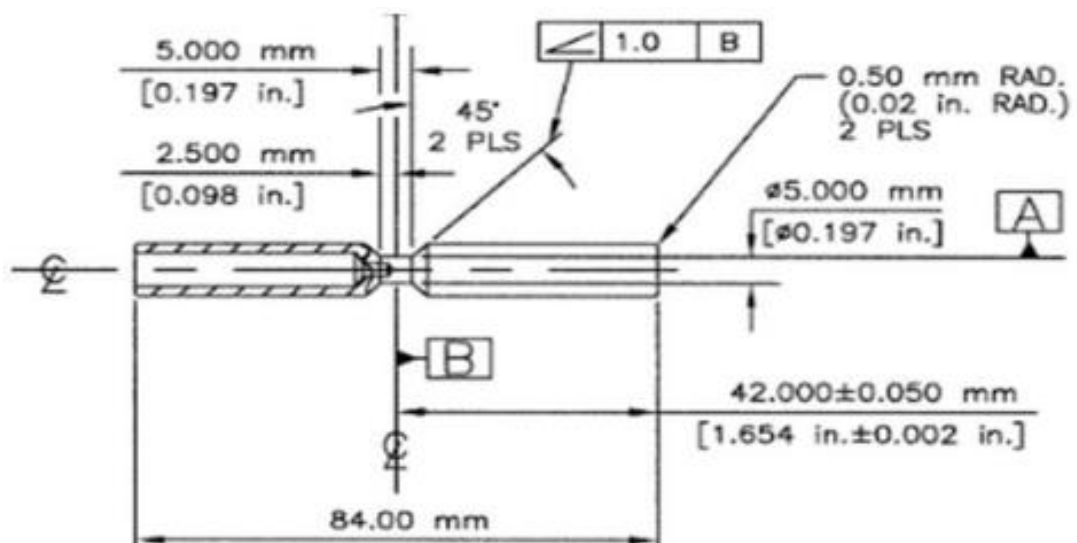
Technical drawing of Gleeble-3500 specimens used in this study
